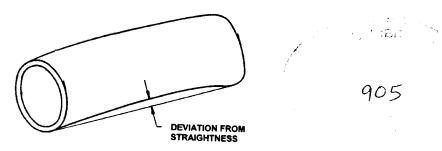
Straightness Tolerance for Extruded Round Tubes
